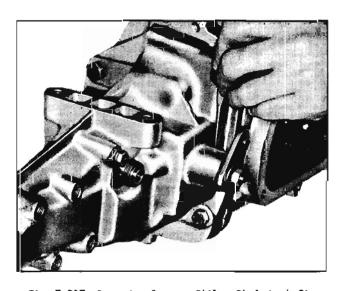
Removing Reverse Shifter Shaft Lock Pin
